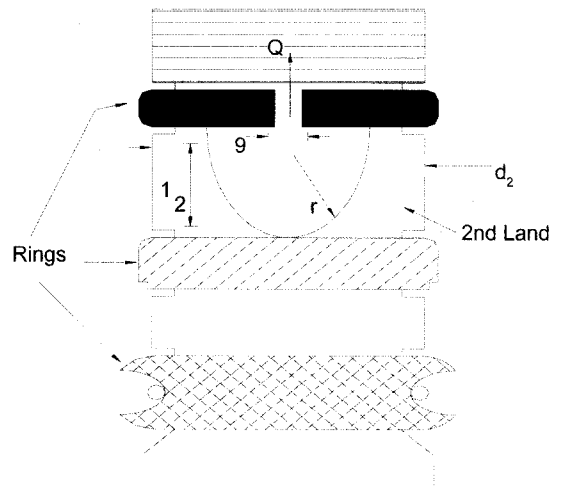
Side view of piston showing dimensions relevant to oil consumption.
